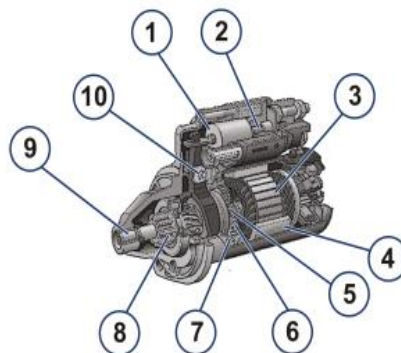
, Schematics of the starter motor used in the tested vehicle A: 1 – activation relay; 2 – springs; 3 – electric motor; 4 – permanent magnets; 5 – transmission; 6 – gears with a roller bearing; 7 – transmission with torsion dampers; 8 – attacking gear; 9 – final sleeve with a roller bearing; 10 – lever [9]
